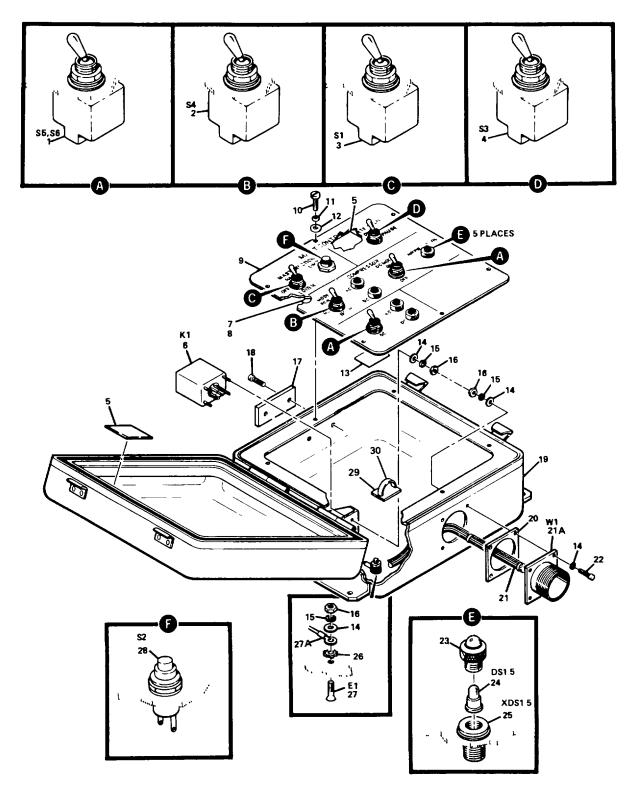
Hydraulic Component Assembly MX-10213/G (Sheet 3 of 3)
